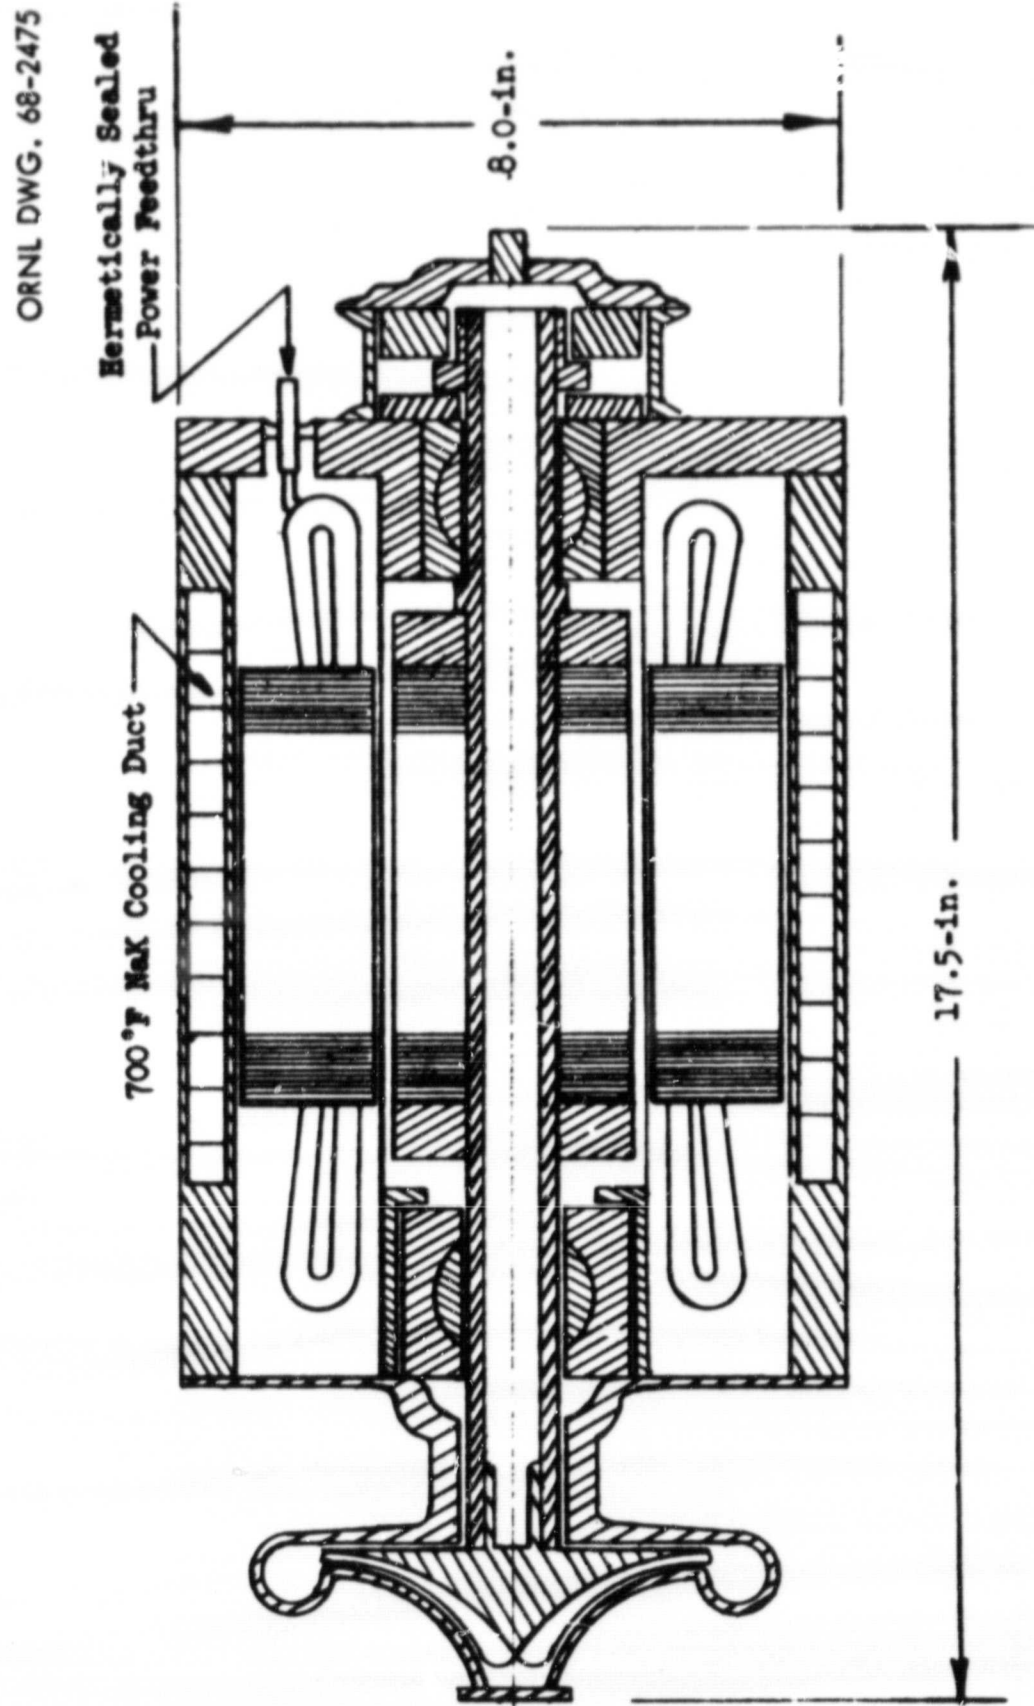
Cross Section of the Preliminary Design of the Canned Rotor Pump for Potassium Boiler Feed Application. Pump weight 160 lb.
